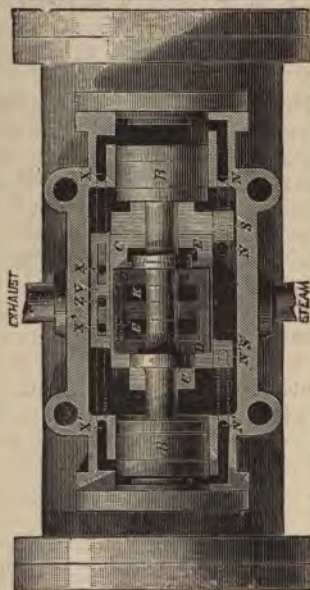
TOP VIEW OF STEAM VALVE CHEST AND VALVES,
